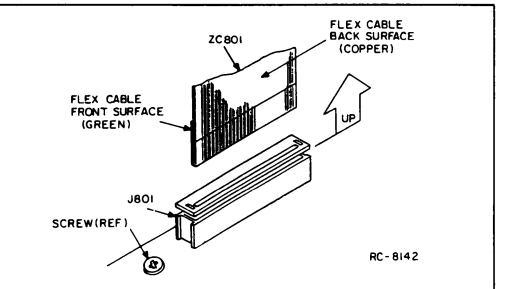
Connecting Flex Cable to J801 on CONTROL PANEL A804
